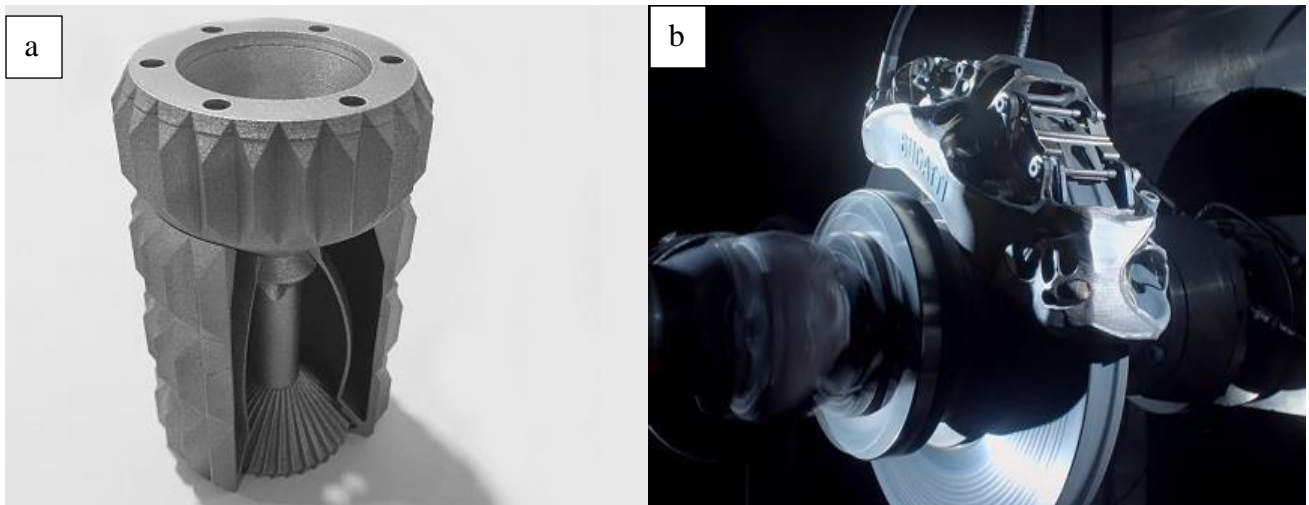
(a) Designers of the Farinia group have limitless design for machine parts because additive manufacturing [50] (b) The titanium brake caliper under test conditions showing no limitation to freedom of design and performance. (Courtesy VW Group)
